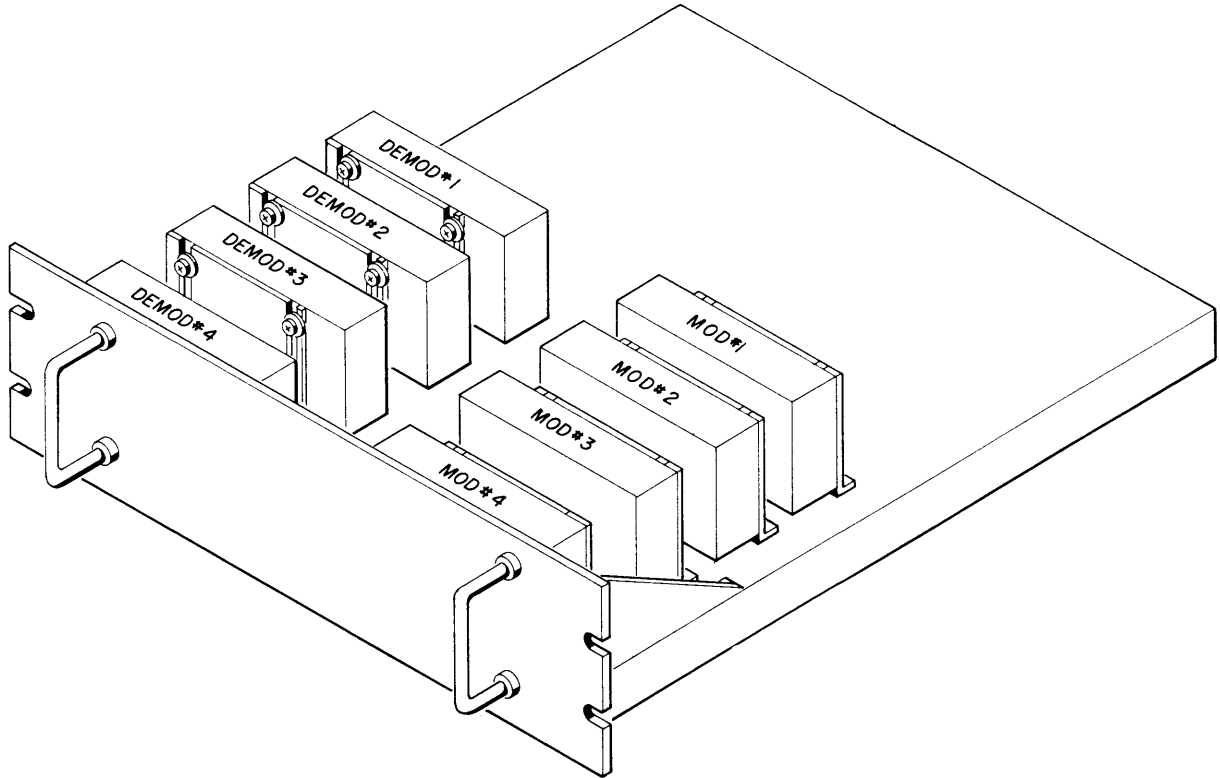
KW-37 BLACK Tone Converter Drawer, Isometric View
